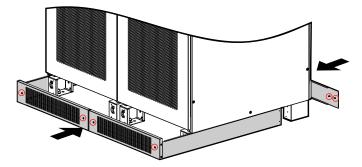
Install bottom cover plates of PS400KVA, PS500KVA, PS600KVA
